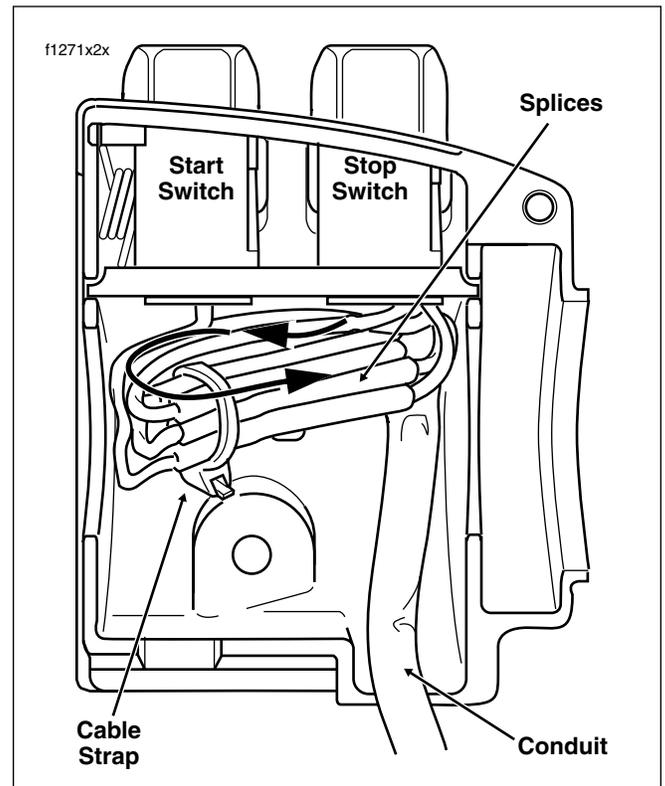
Upper Right Handlebar Switch Housing (With Splices)
